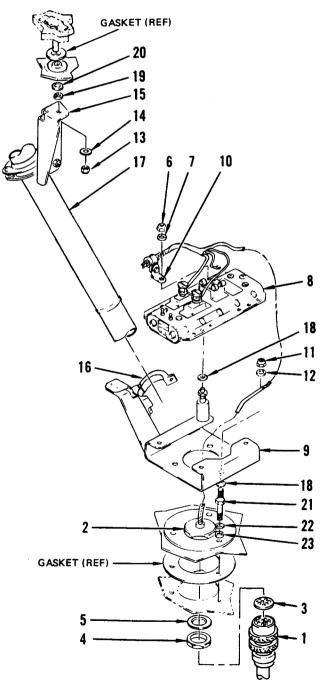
Removal; Main Sump Tank (Sheet 2)
